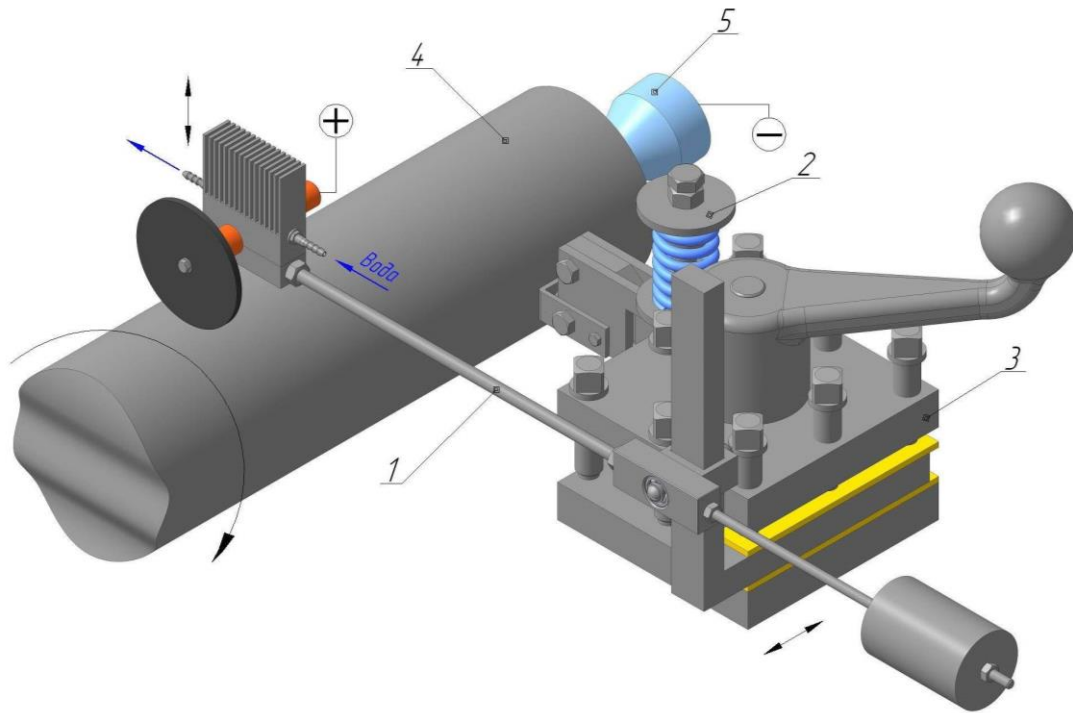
Three-dimensional model diagram of the installation combined to form a wear-resistant coating on the details of the type of shaft, authors: 1 - a device for ESA; 2 – breaking-in device; 3 - caliper screw-cutting lathe; 4 - workpiece; 5 - electrically contact center / Тривимірна модель-схема установки для формування комбінованого зносостійкого покриття на деталях типу вал, авторська розробка: 1 - пристрій для ЕІЛ; 2 - пристрій для обточування; 3 - супорт токарно-гвинторізного верстату; 4 - оброблювана деталь; 5 – центр з електричним контактом
